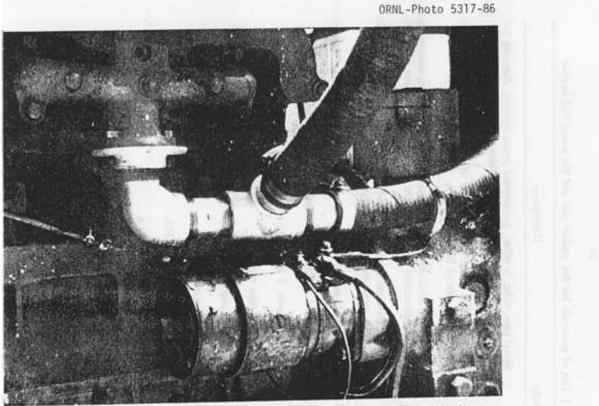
Carburction unit attached to engine's existing intake manifold. Wood gas enters from the side of the tee; air enters from the right-hand end. The butterfly valve at the right (partially obscured) is connected to the air control (choke) cable; the left valve is connected to the throttle linkage.
